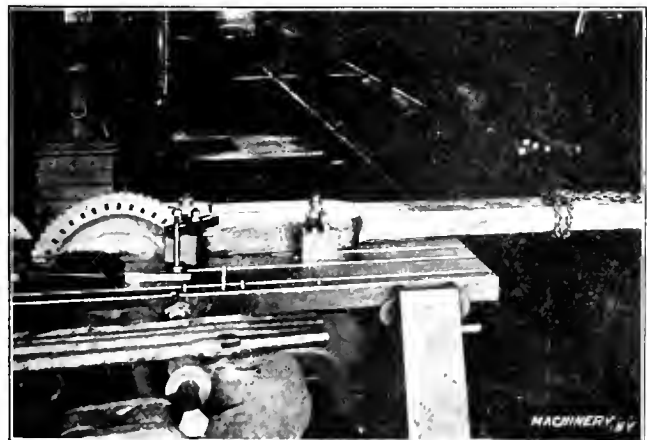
Sawing out the Metal in the End of a Main-rod with a Higley Cold Saw
